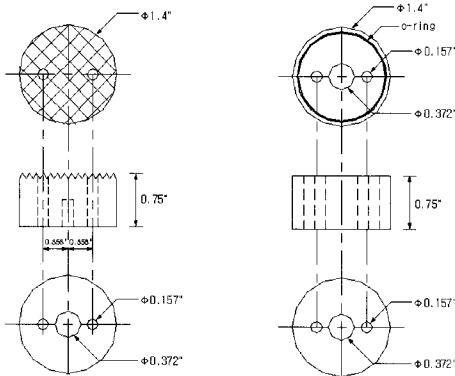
Drawings of base pedestal parts (note: 1"=2,54cm)
